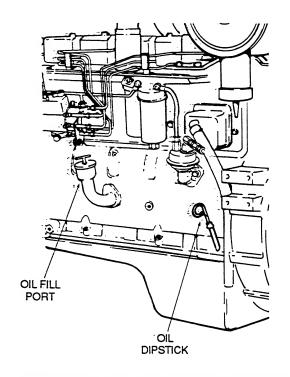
OIL FILL AND DIPSTICK LOCATION
